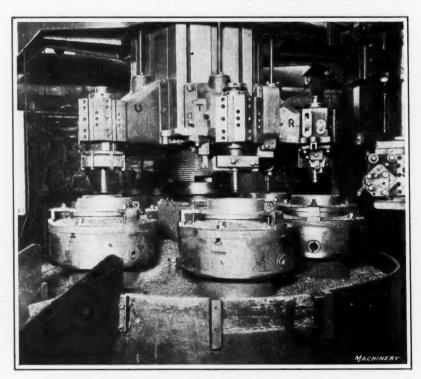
Rear View of Machine shown in Fig. 12 equipped for performing Second Sequence of Machining Operations
